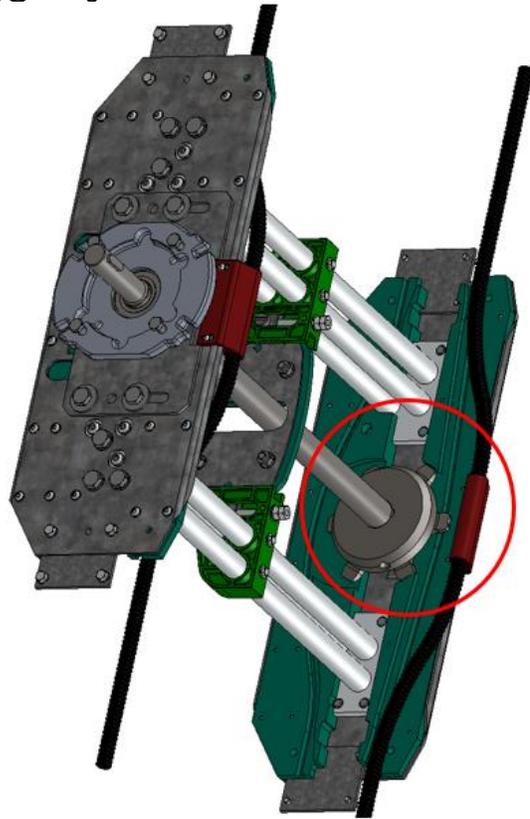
Conversion from a small deflection top drive to a large deflection bottom drive.
